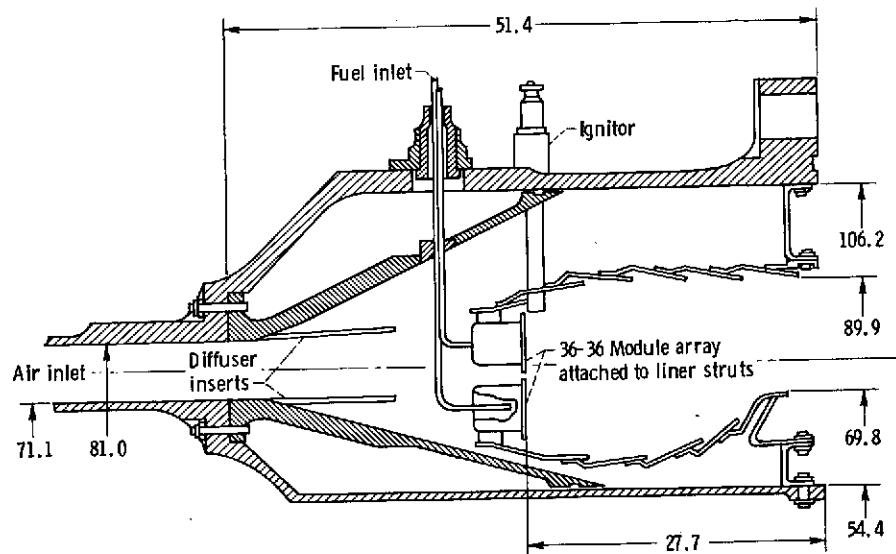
36-36 Module swirl-can combustor configuration. (Dimensions are in cm.)
